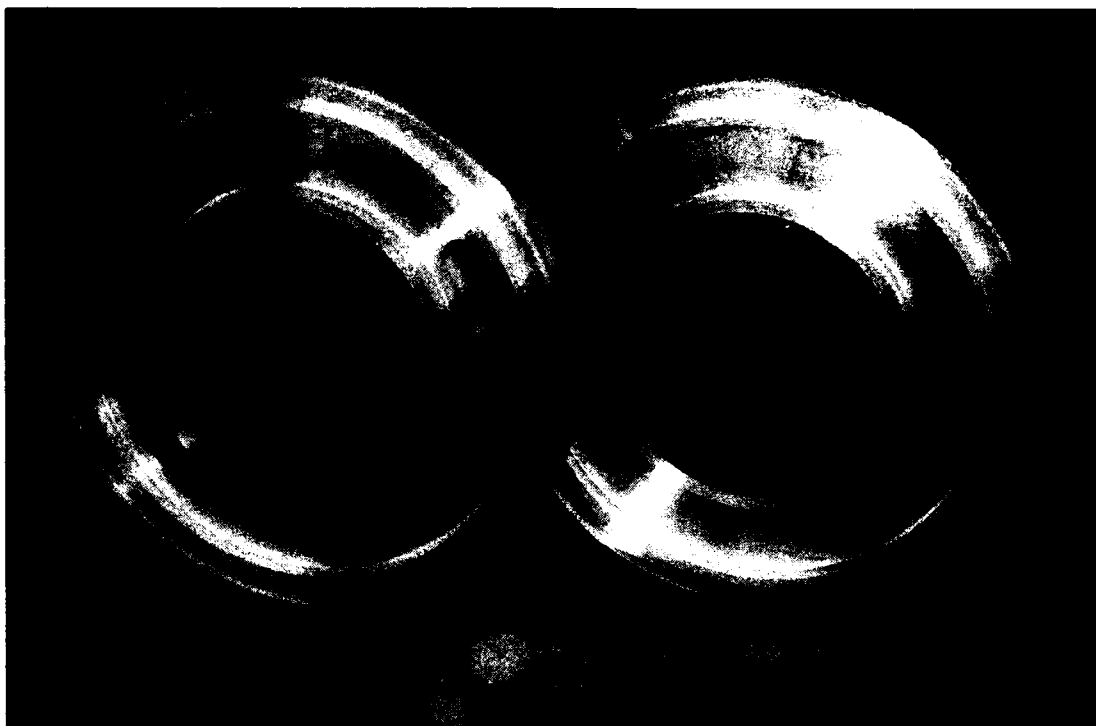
Typical removable joint ring stiffeners for 12-inch-diameter housings.
